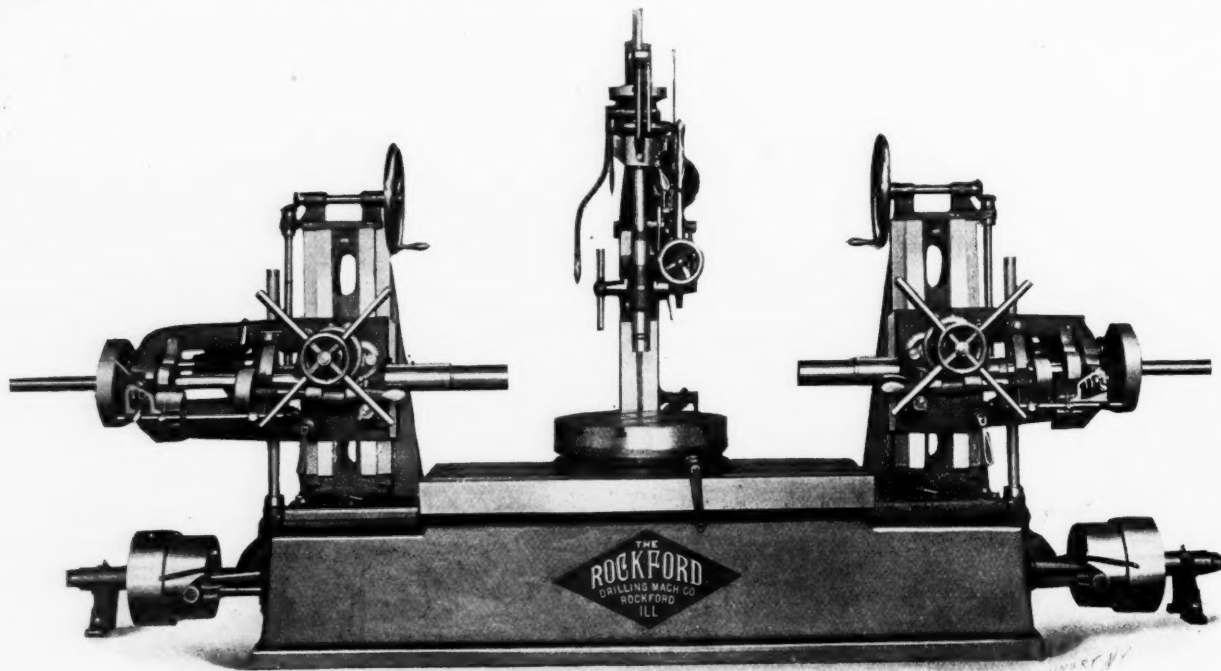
Boring Machine with Drill Press for Drilling and Tapping Operations
